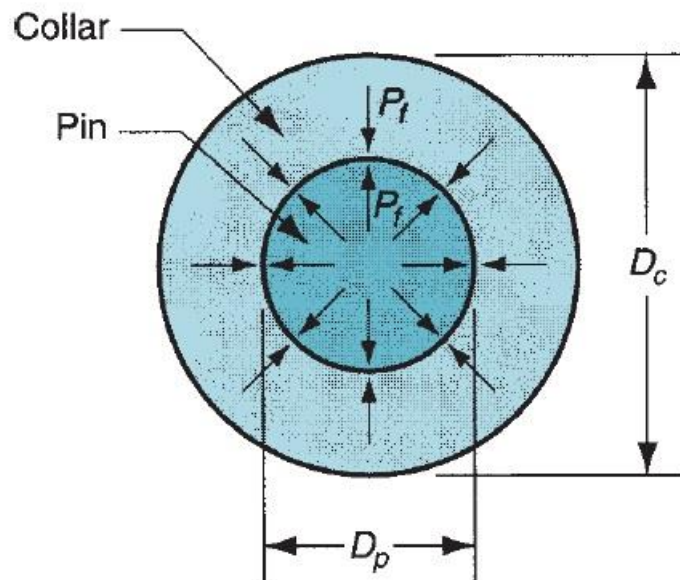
Cross section of a solid pin or shaft assembled to a collar by interference fit.
